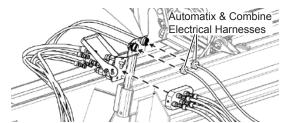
Connect Multicoupler & Electrical Harnesses
